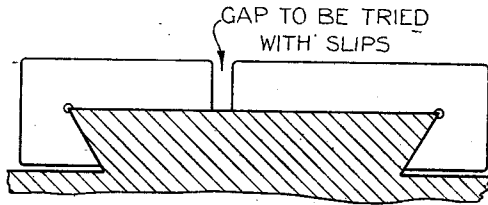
A profile-gauge in two parts for gauging a male slide. used in conjunction with the part already on the slide, but the larger part cannot.
